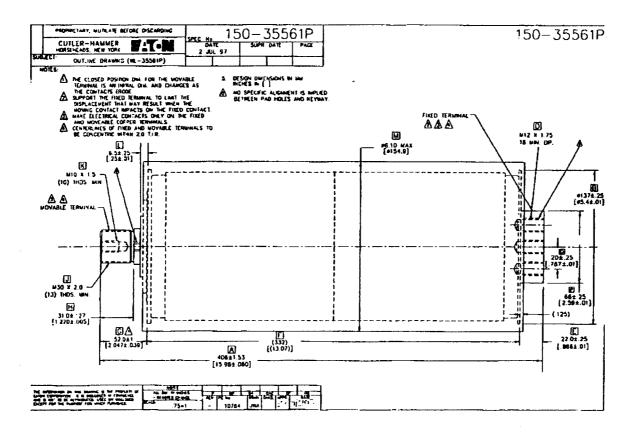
24kV Vacuum Interrupter Bottle Manufacture's Outline Drawing
